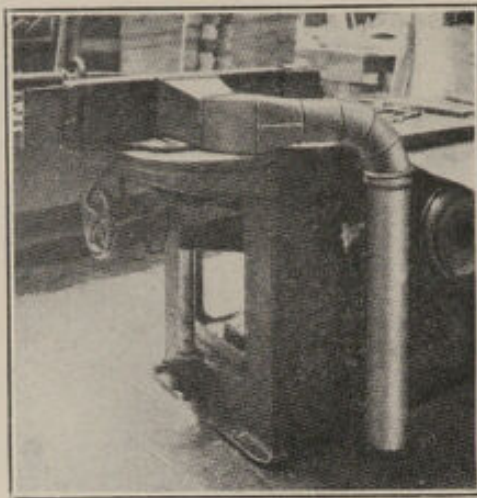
Hood and Pipe for removing Dust and Chips from Spindle Moulder.
